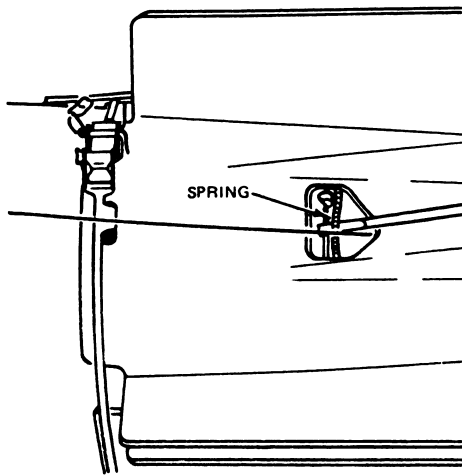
Peeling garter spring out of groove with screwdriver.
